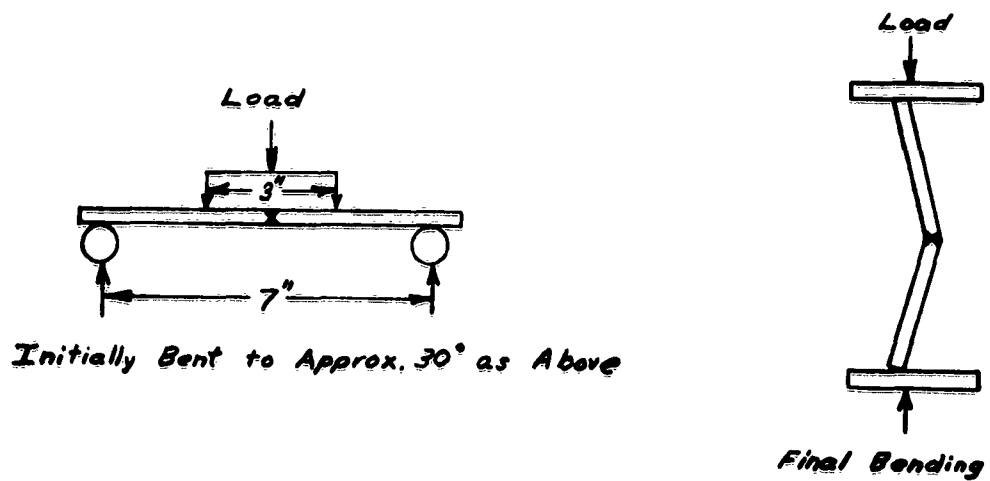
METHOD OF LOADING FREE BEND BUTT WELD SPECIMENS
